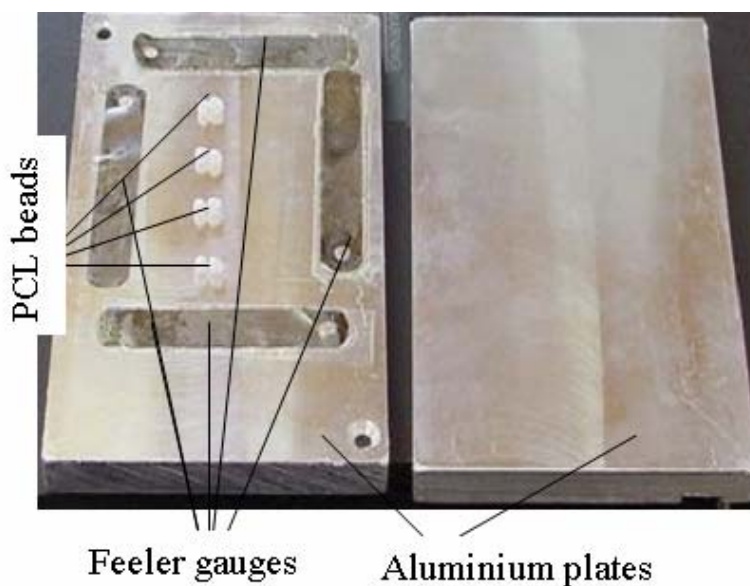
Photograph of plates, PCL bead and feeler gauges used to manufacture PCL membranes.
